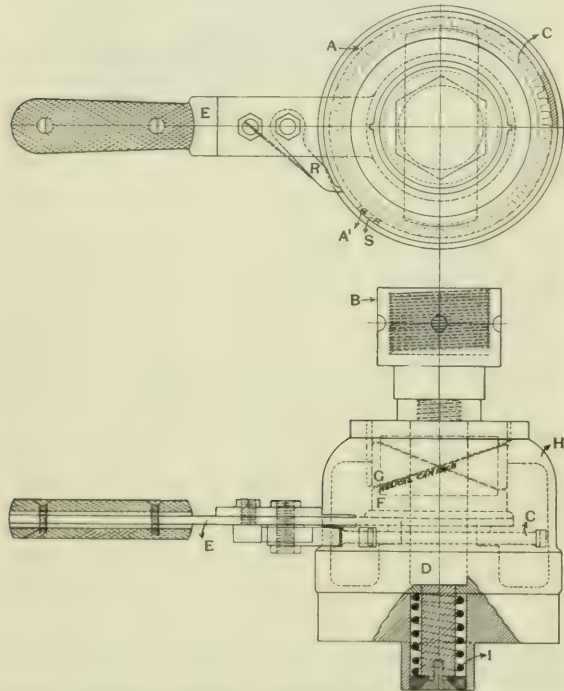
Chuck for Milling Grooves on Injector Water Nuts.
